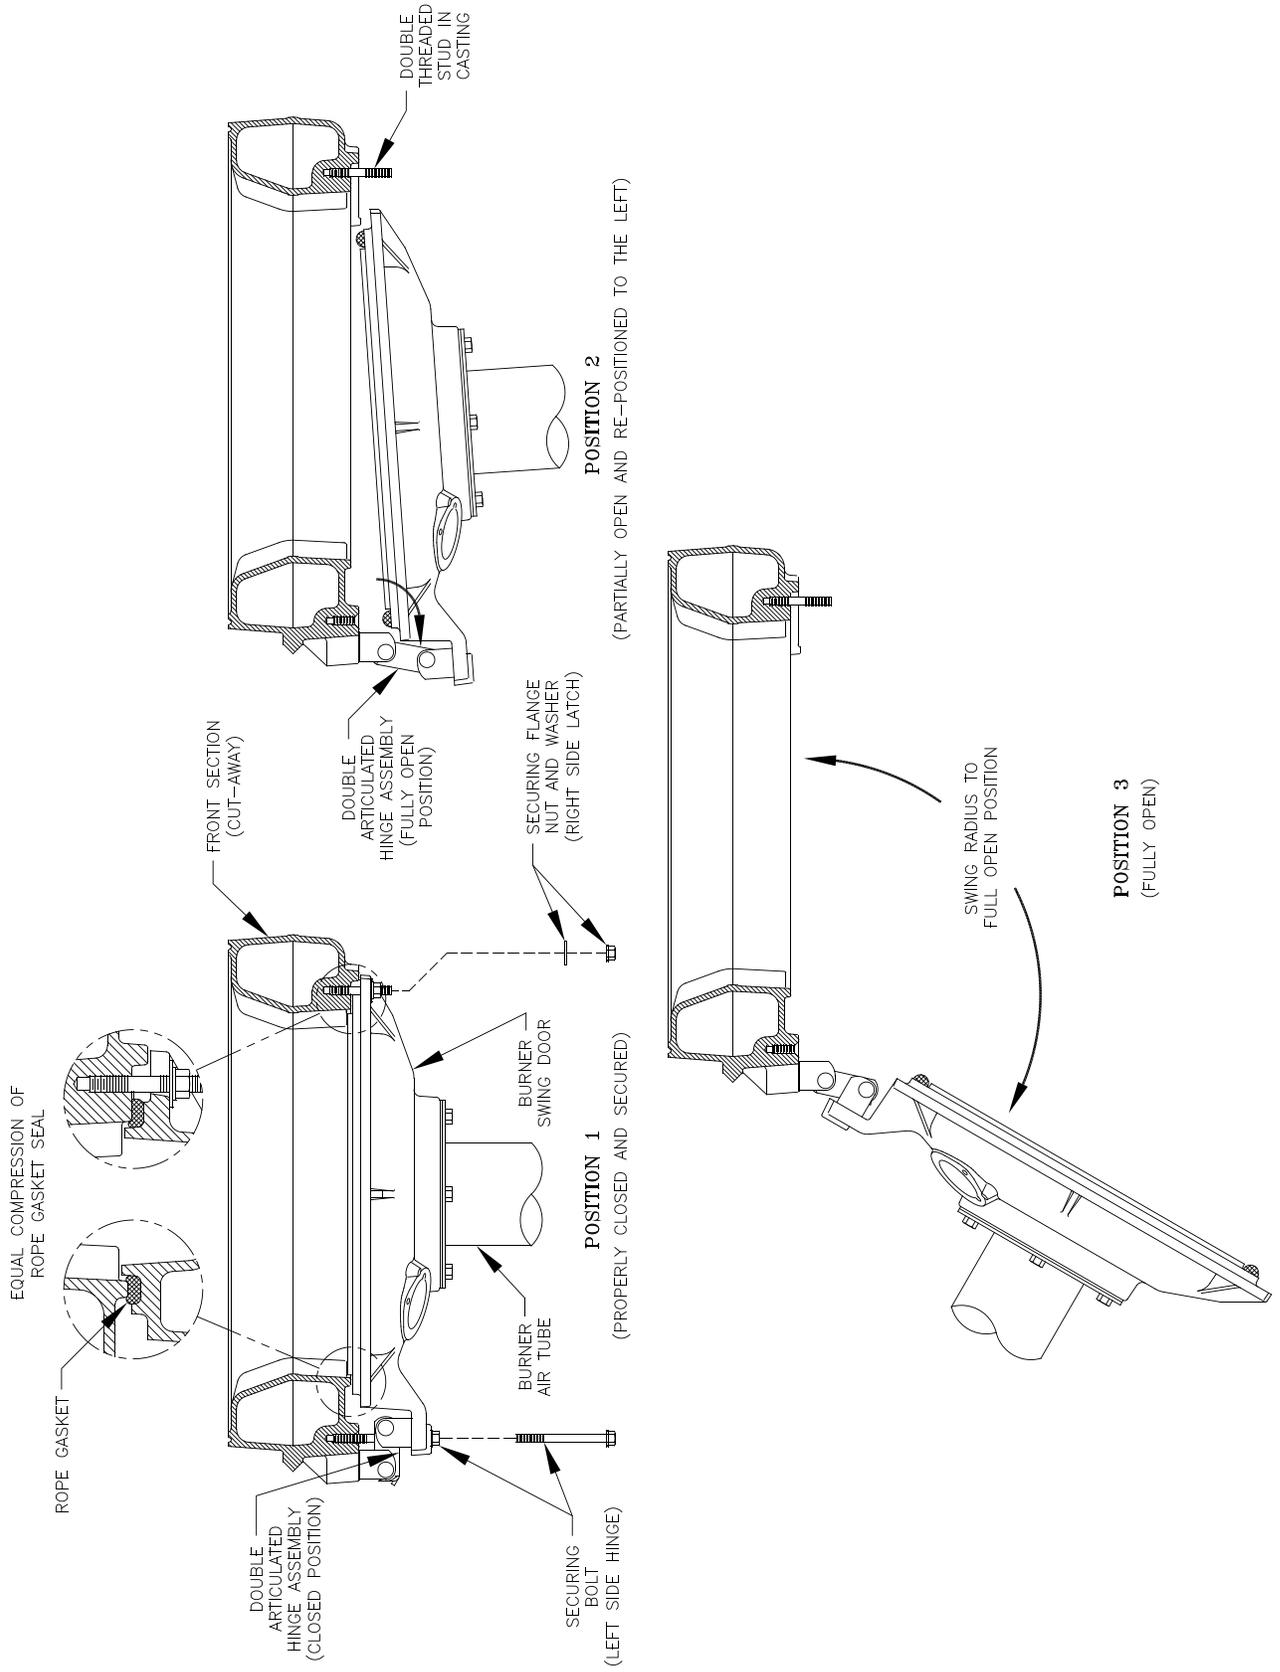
Top View - Burner Swing Door Mounted to Cast Iron Block Assembly (Jacket Removed for Clarity)
